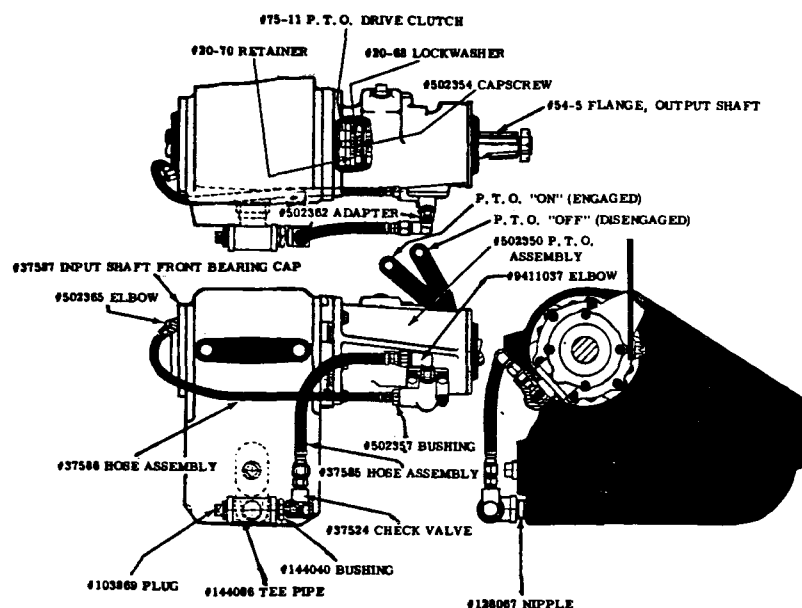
T-223 Power Take-Off Assembly Oil Pump
